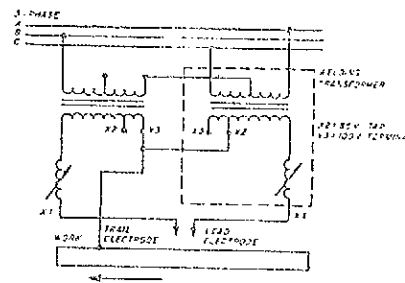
Alternating-current arc welding transformer connections for Scott-connected system
